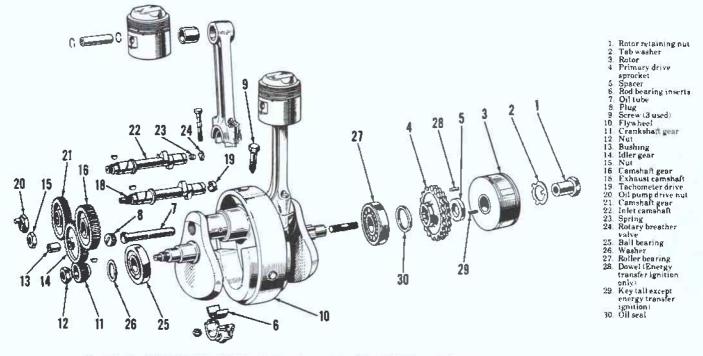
Exploded view of the crankshaft and camshafts. Nuts (15 & 20) are left hand thread.
